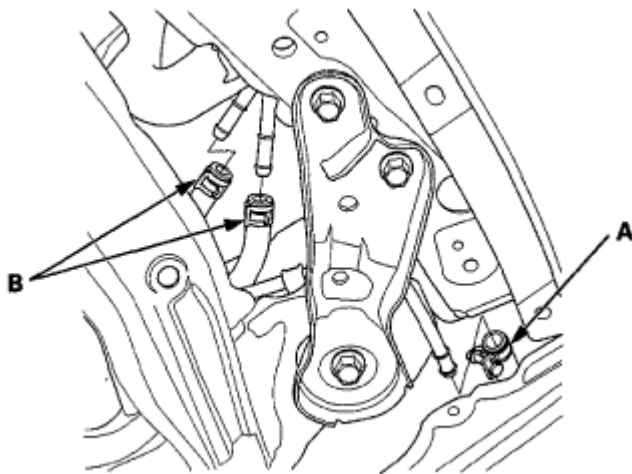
Identifying Power Steering Hose And A/T Cooler Hoses
